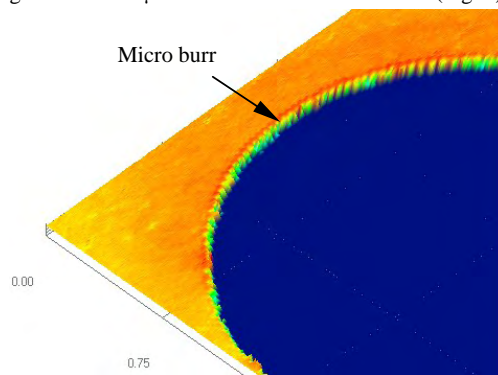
Micro burr in the blanking hole $\varnothing 2\text{mm}$
